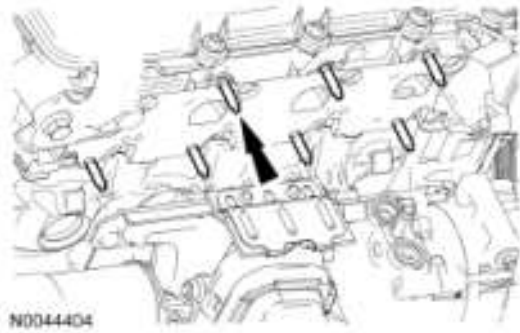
Locating RH Exhaust Manifold-To-Cylinder Head Studs
